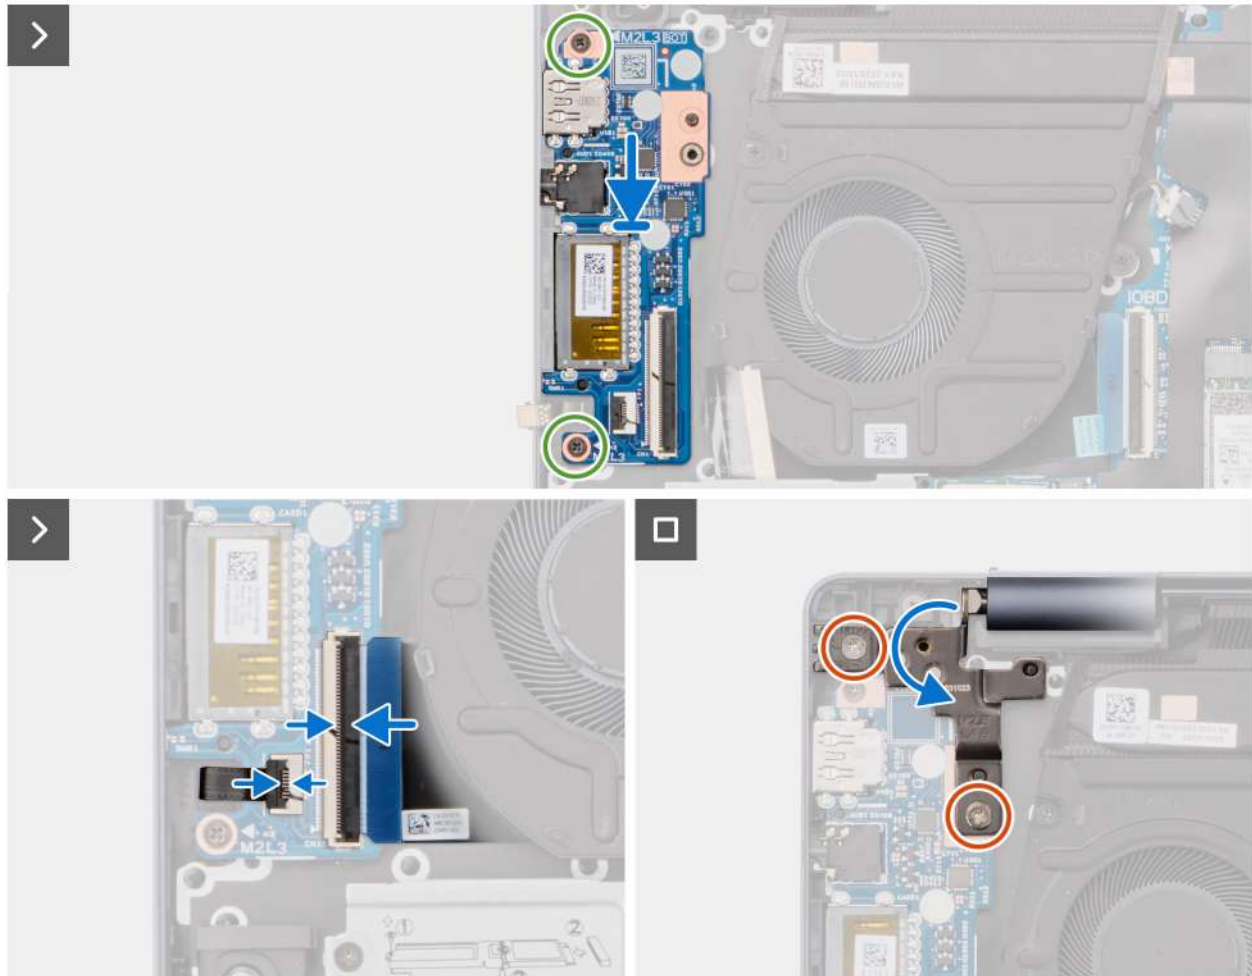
Installing the I/O board (for computers shipped with an aluminum chassis)
